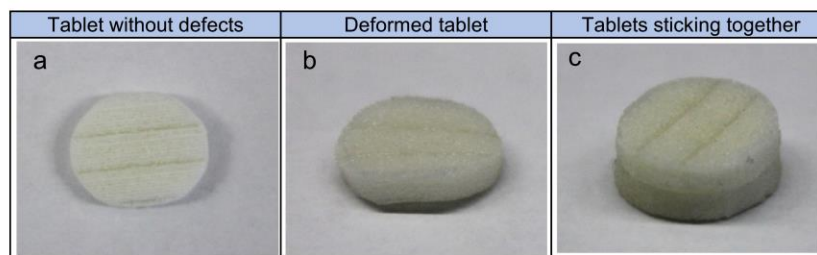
Tablet without defects (VA64-K20 printed with E70) after printing and drying (a), deformed tablet (b) and tablets sticking together after 2 weeks of storage (c).
